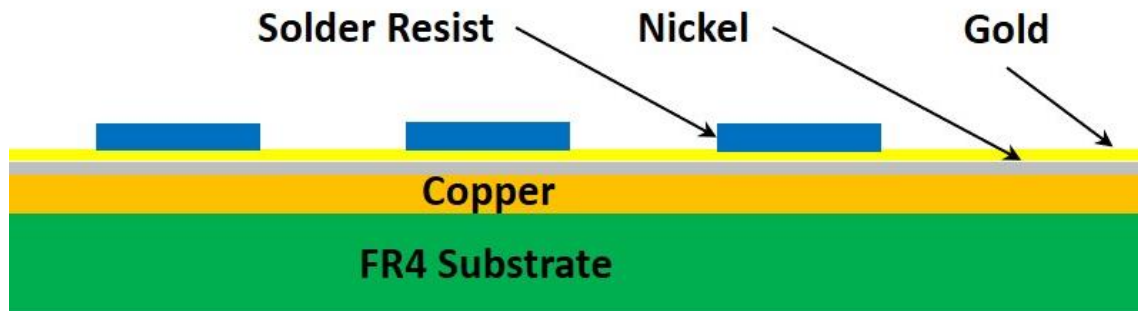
Cross-sectional view of designed Hall devices on PCB.
